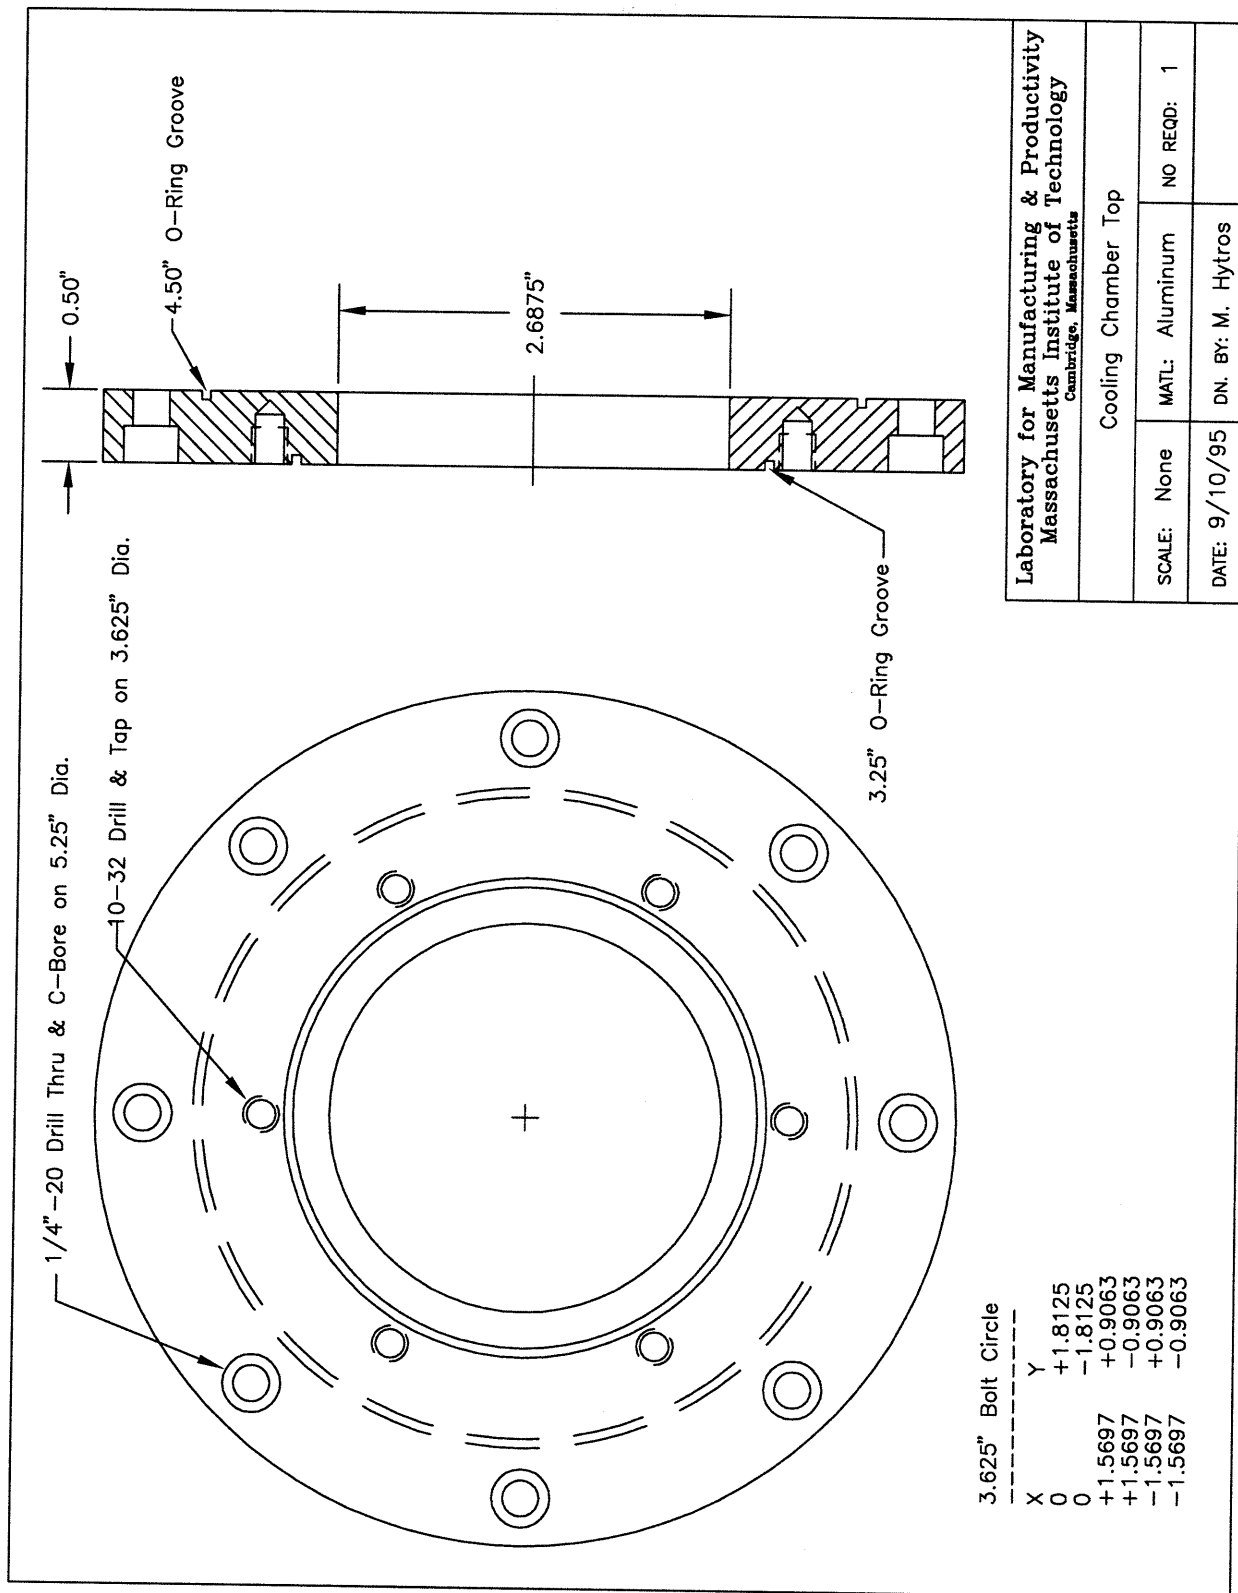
Detail Drawing of Water Cooling Chamber Top Plate
